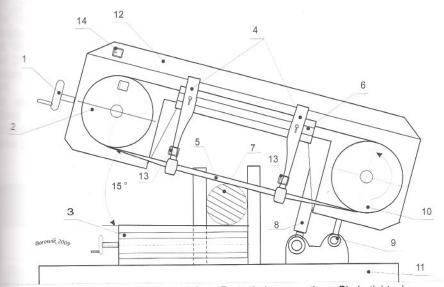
Identification of Basic Cutting Bandsaw Parts during operations: Blade tightening screw 11. Stretching wheel (2), Assembling clamping block (3), Stationery blade guard (4), Blade (5), Support of blade guard (6), Material to be cut (7), Hydraulic linear motor (8), Head frame pulley 12. Active wheel (10), Frame of cutting bandsaw (11), Head of cutting bandsaw (12), Accelerometer sensors gathering the impulse burden (13), Tilt sensors gathering the head deflection data (14)
